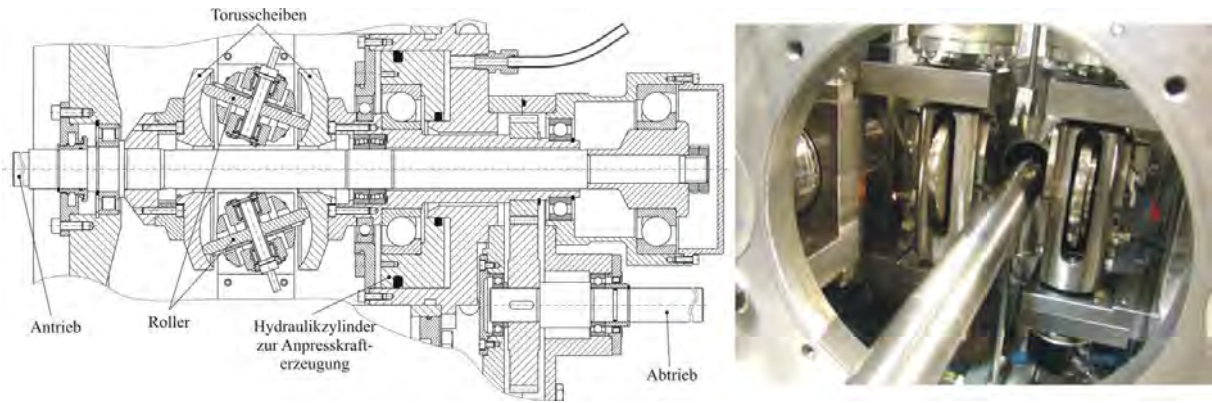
a) Drawing of the measured transmission and b) a picture of the tested T-CVT [118].
